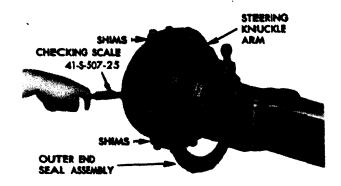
Checking Load on Knuckle Support Trunnion Bearings
